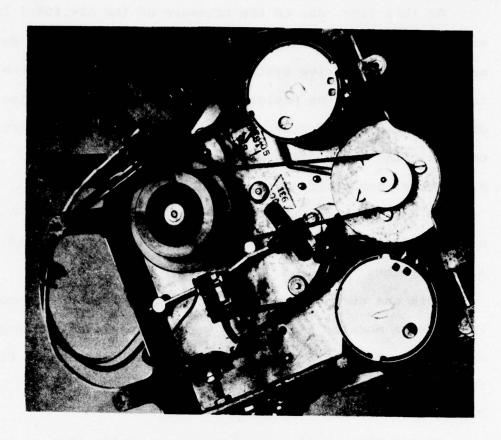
Underside of the tape deck showing inadequate rubber belt used to drive the capstan.
